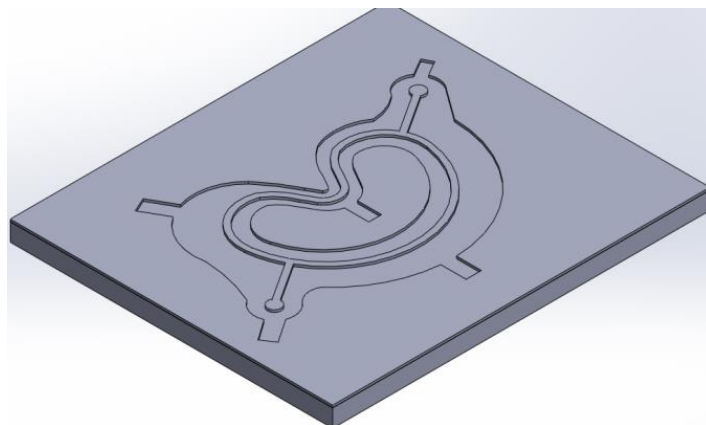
Closed Loop Channel Master Mold Design for PCB
